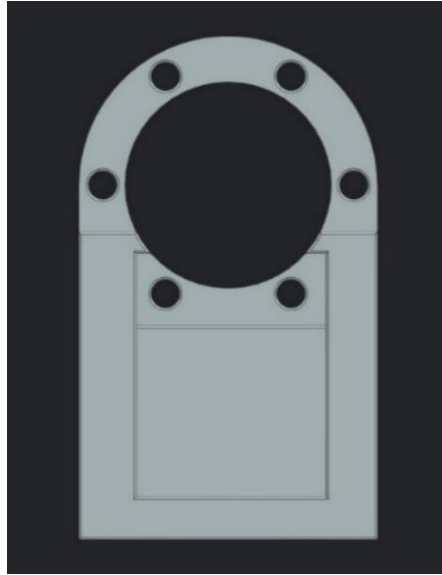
Side View of 3D-Printed Flange Interface and Linear Actuator Mount
